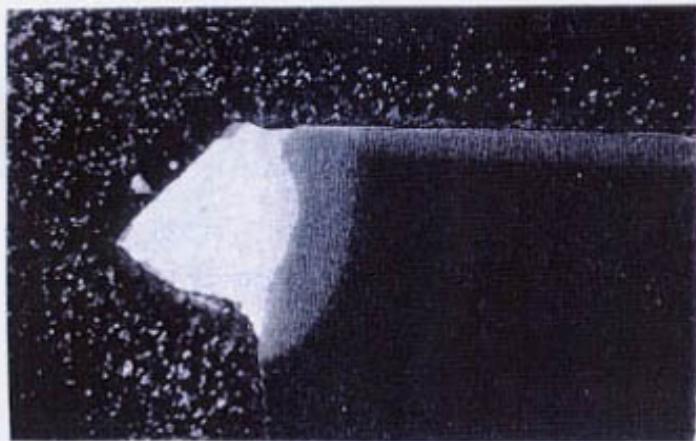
b: Fracture of bottom lock mock up welds
